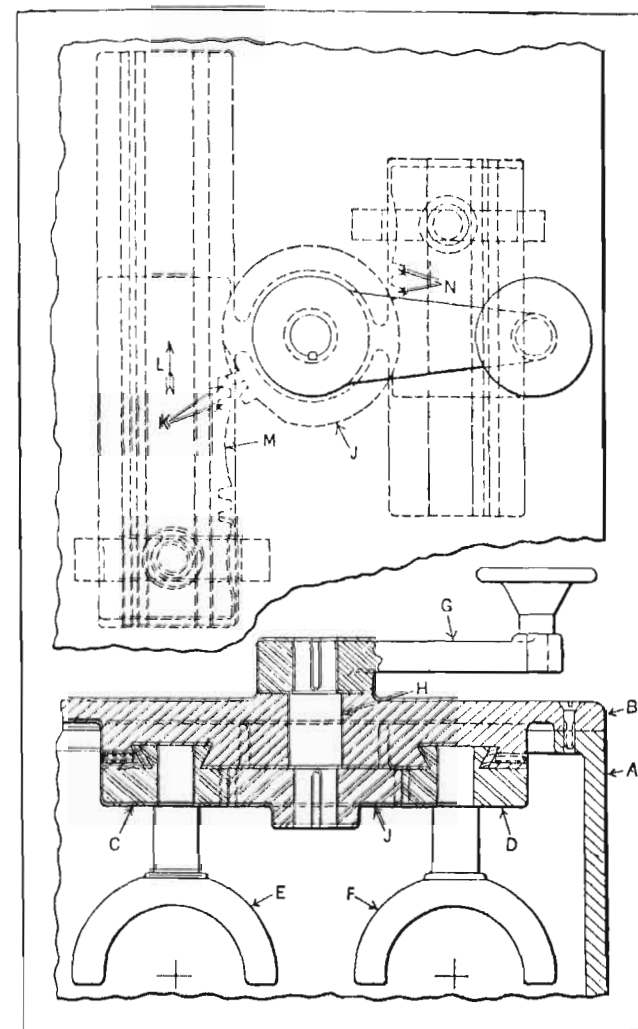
Gear-shifting Mechanism that Insures Easy Changing of Gears in Order of Speed Ratios
